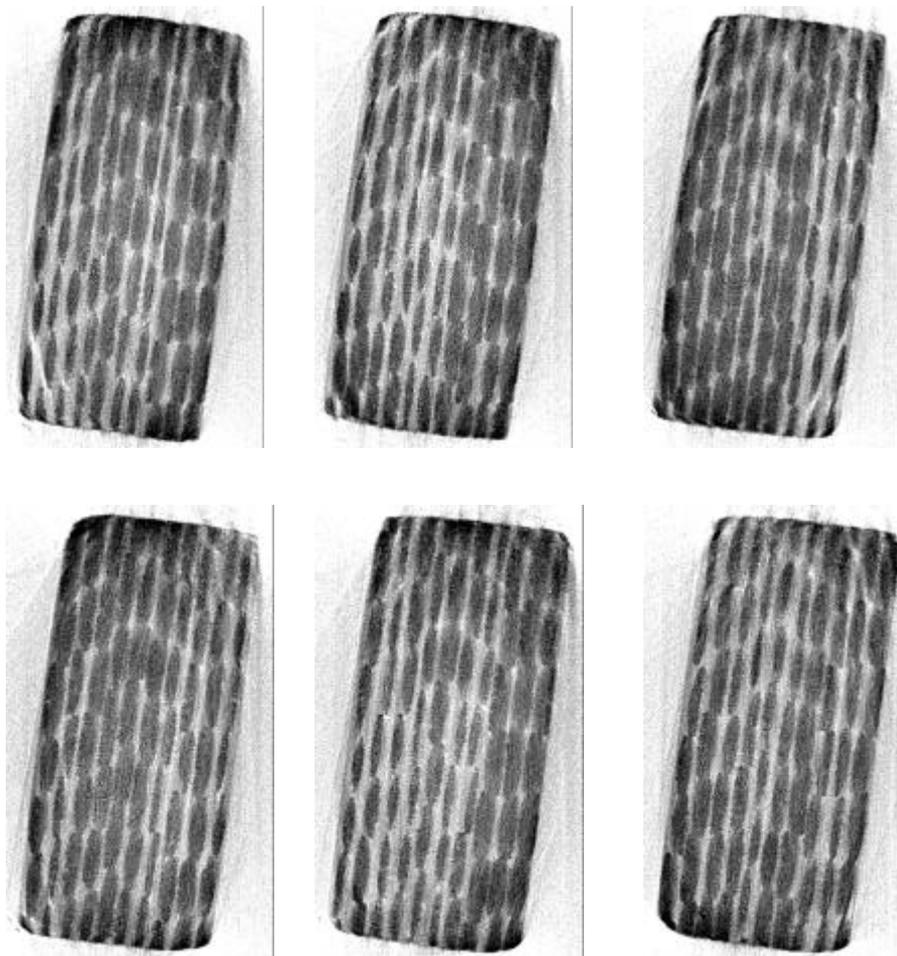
Reconstructed cross sections of glass plane weave vinylester composite.
